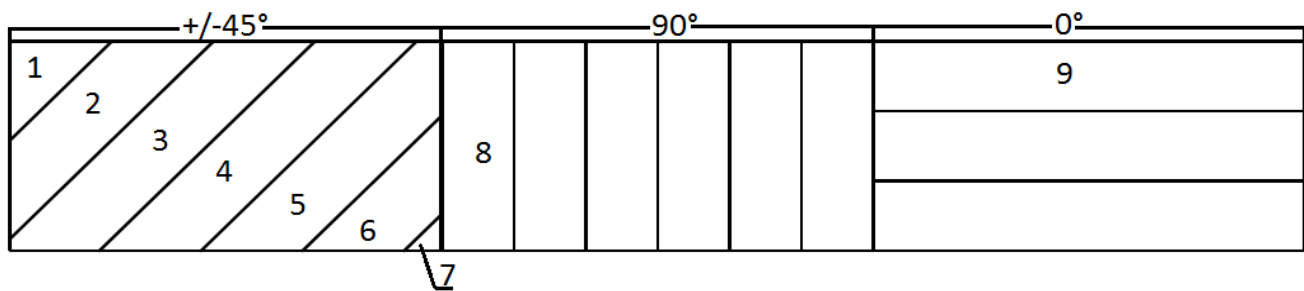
Ply Arrangement for the Laminate of the Masthead Side Plate (material roll width 300mm)
